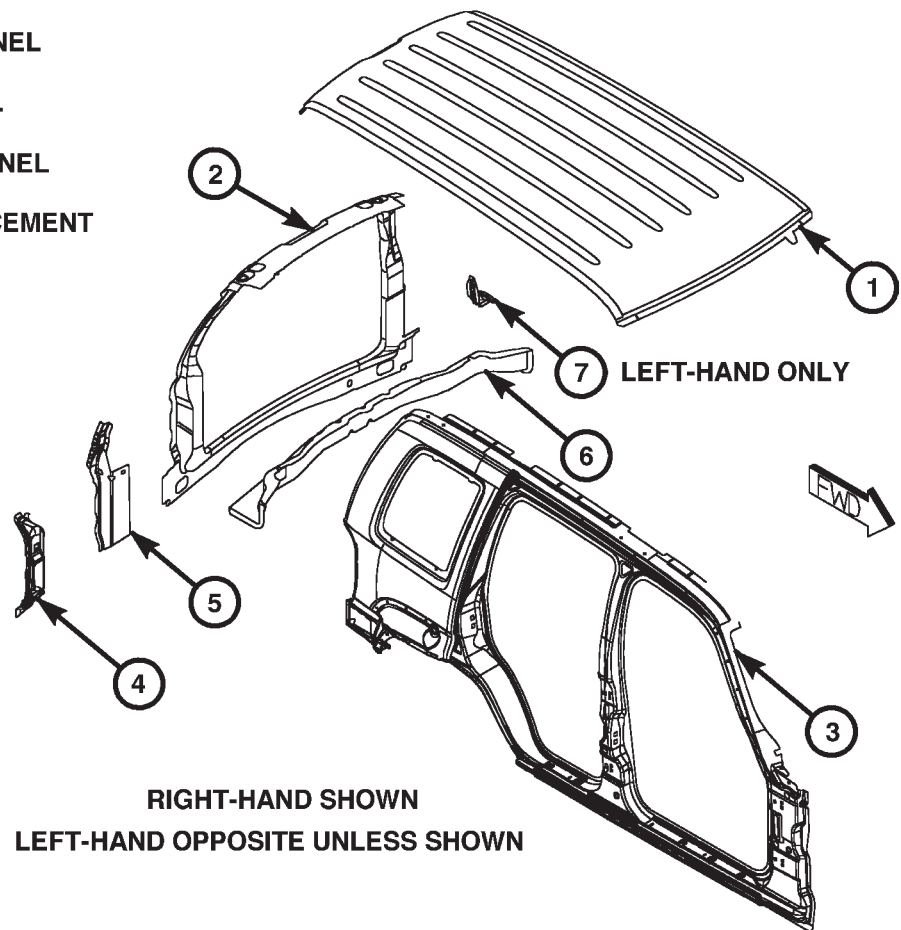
ROOF PANEL & BODY SIDE SILL ASSEMBLY
